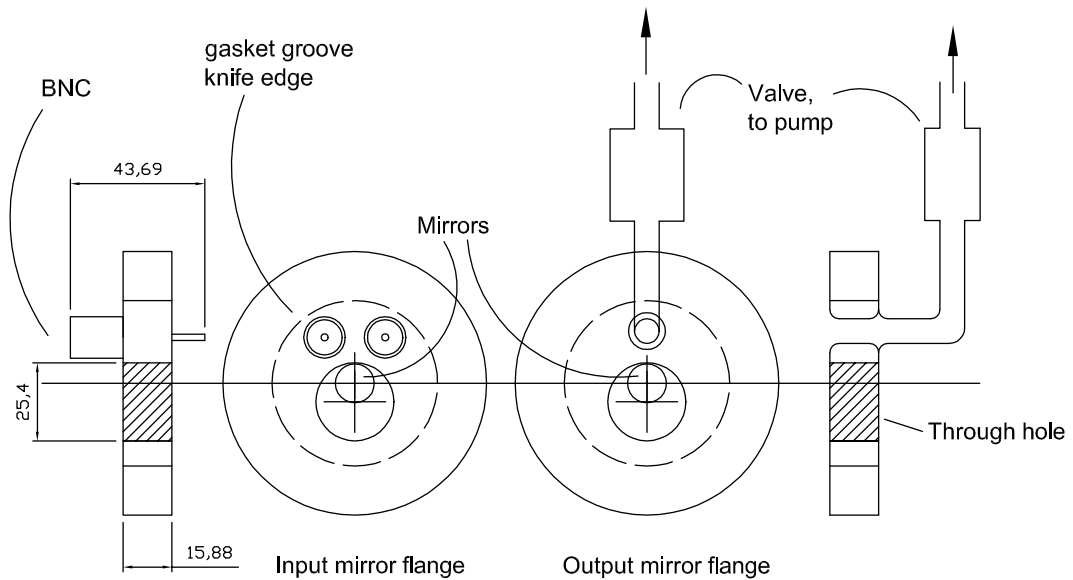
Schematic drawings of the two  $3\frac{3}{8}$ " flanges used for closing the vacuum component shown in figure 10.3. The first flange (input mirror side with BNC feed through) is shown in a cross section on the very left hand side. Next to it, the front view is shown. The front view of the second flange (output mirror side with valve) is shown along with the cross section next to it. The position of the mirrors of the cavity is indicated. Bolt holes are omitted, but the outer knife edge of the gasket groove is shown as a dashed line. Optical access is provided through the flanges, where uncoated substrates are fitted into a provided groove using two component UHV glue. We found that etalon effects between the two windows played no role. The substrates in the feed through holes are located off center with respect to the flange. We used weldable BNC connectors for the PZT connection. They are grounded onto the vacuum body. Due to problems with grounding and 50 Hz pick-up effects, a proper connection to a large ground, i.e. the laser table, is advisable. On the inside of the vacuum housing, we soldered the PZT wires to the adapters. We used ordinary tin-solder, but found it to contribute negatively to the quality of the the vacuum. All dimensions are given in mm.
